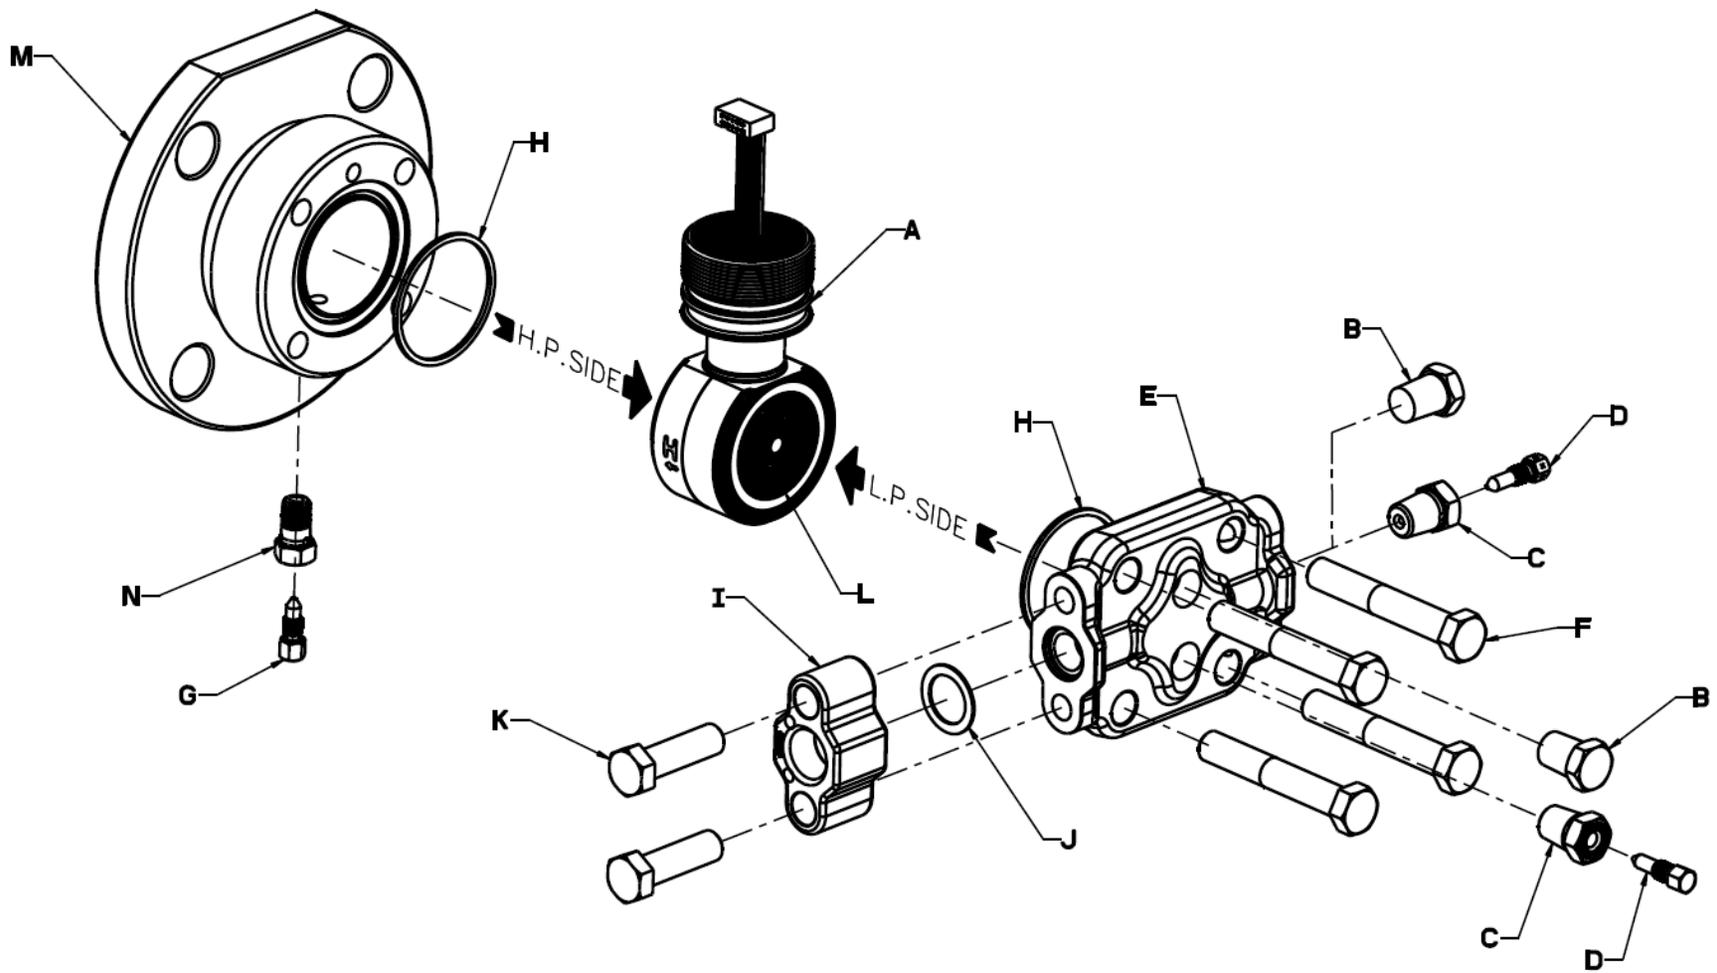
Schematics of pseudo flange mounted transmitter assembly
